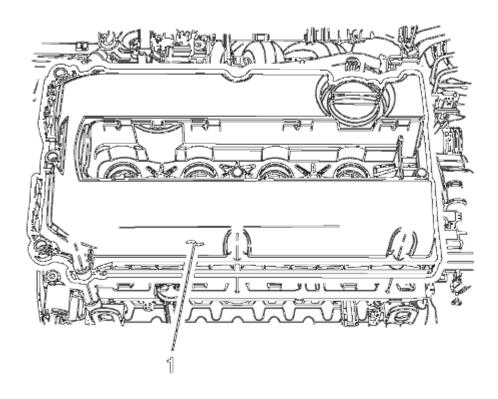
Camshaft Cover Courtesy of GENERAL MOTORS COMPANY
